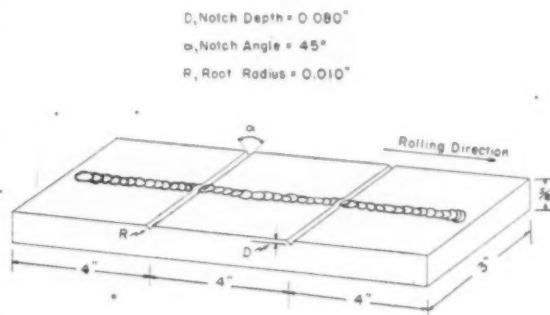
LEHIGH SLOW NOTCHED-BEND SPECIMEN WITH WELD
